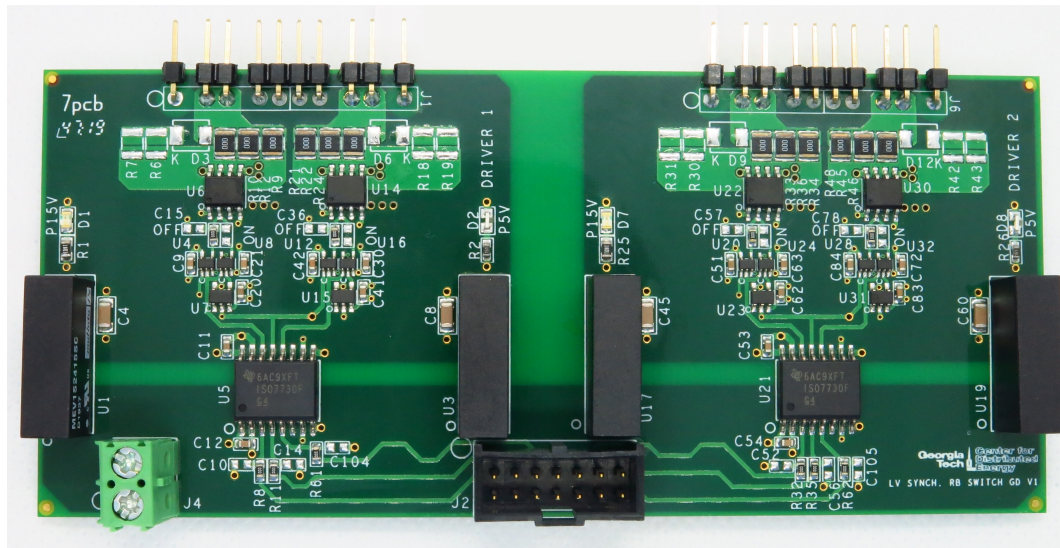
High resolution picture of the built PCB of the 48 VDC S4T bridge gate driver. The gate driver mounts in a perpendicular manner to the power stage using the pin headers at the top of the PCB.
